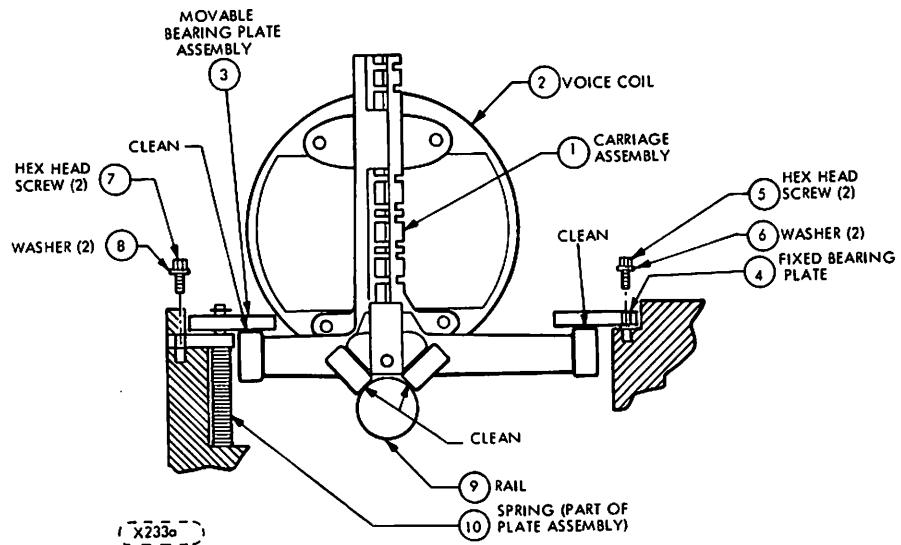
CARRIAGE RAILS AND BEARINGS
